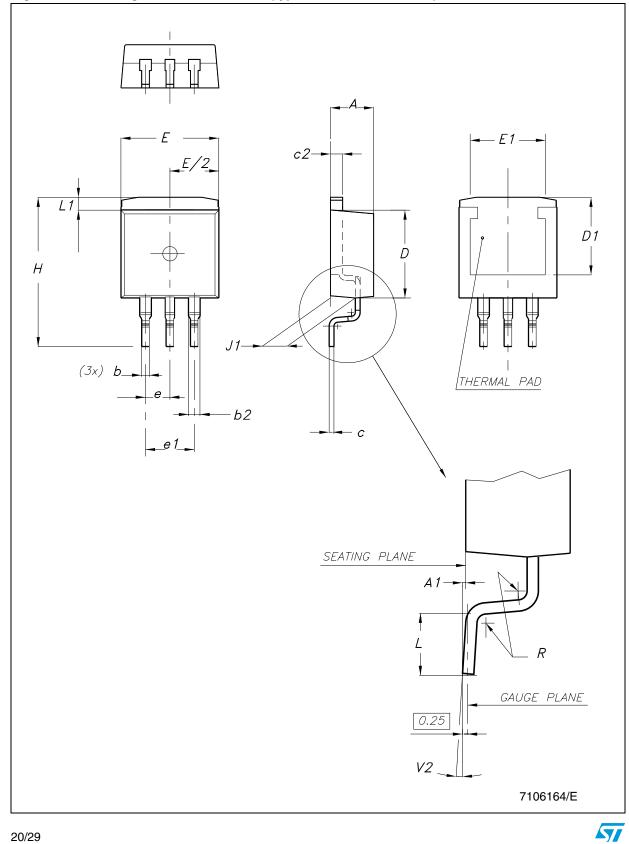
Drawing dimension D²PAK/A (type WOOSEOK-Subcon.)
